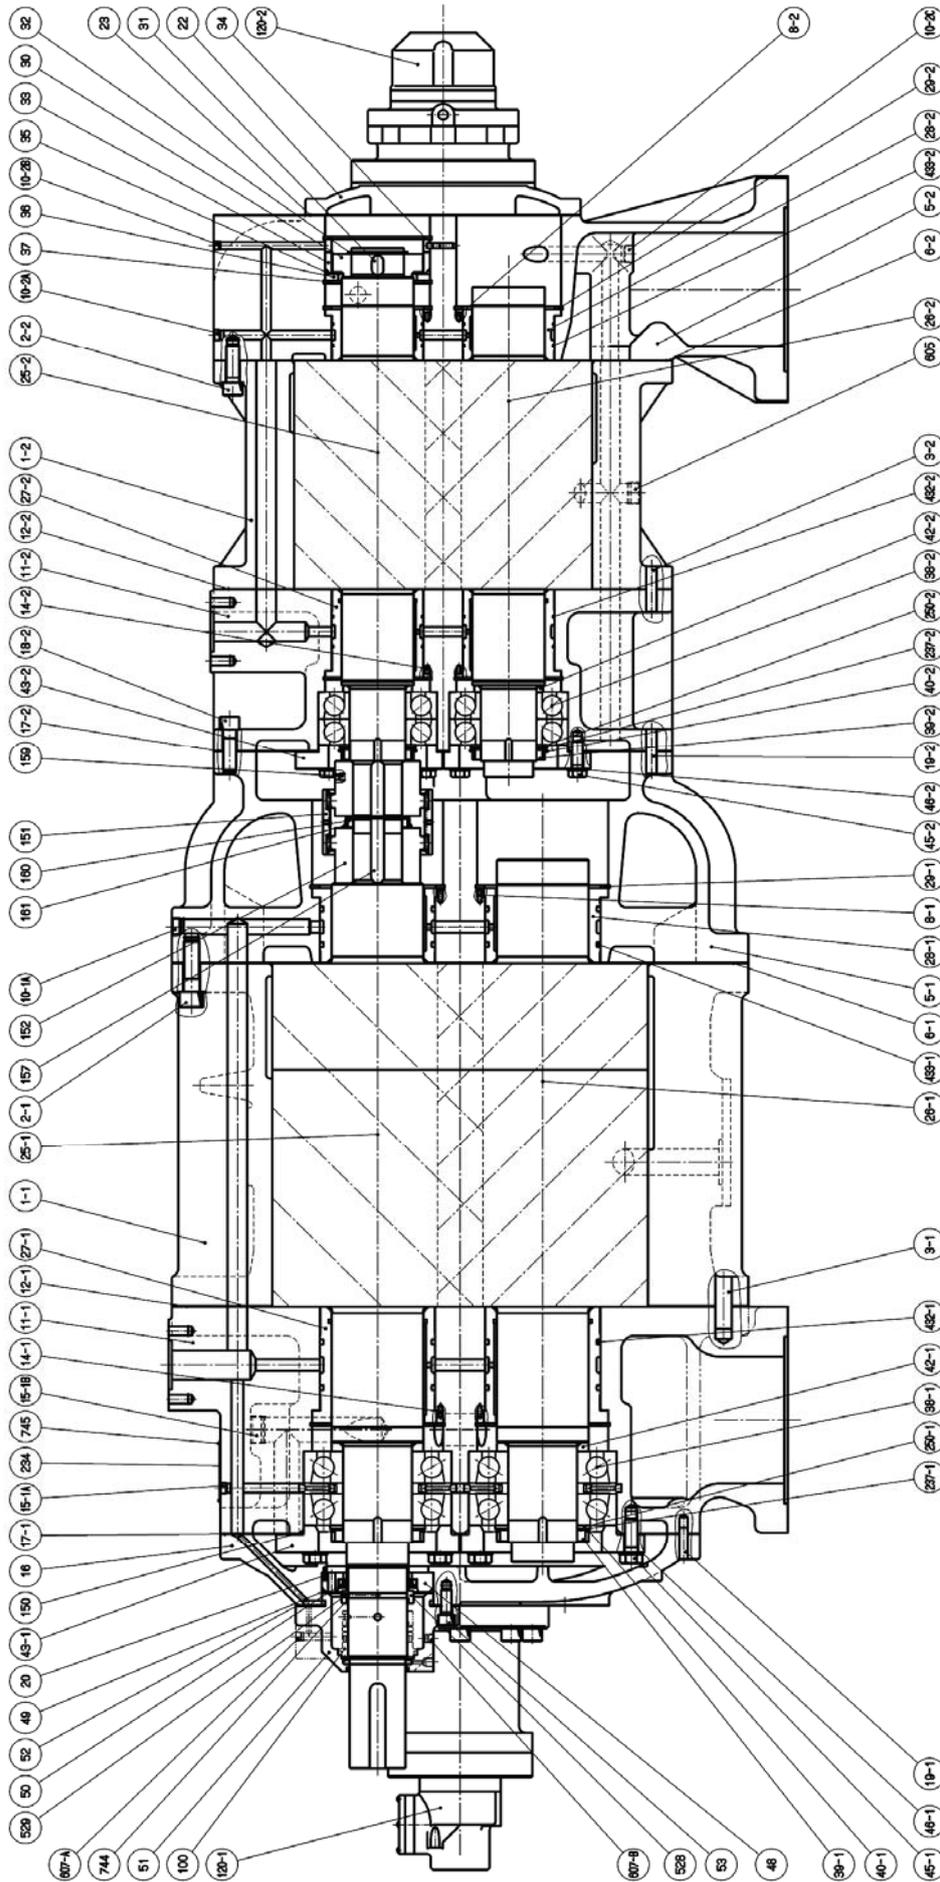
3225LMC Assembly Sectional View (Horizontal)
